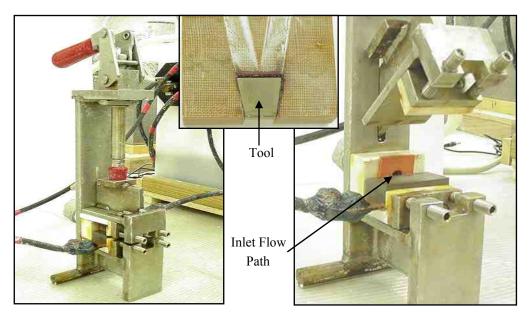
Parallel Flow Surface Finishing Fixture: (left) assembled view, (center) tool, and (right) coupon loading position
